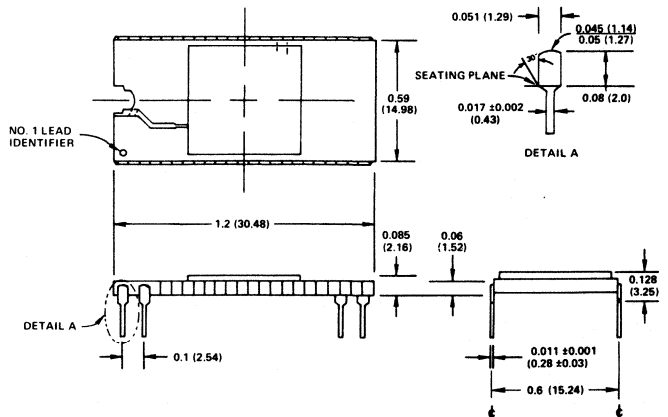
Hermetically-Sealed Ceramic Side-Brazed Package (Type D) 24-Lead Dual-In-Line
